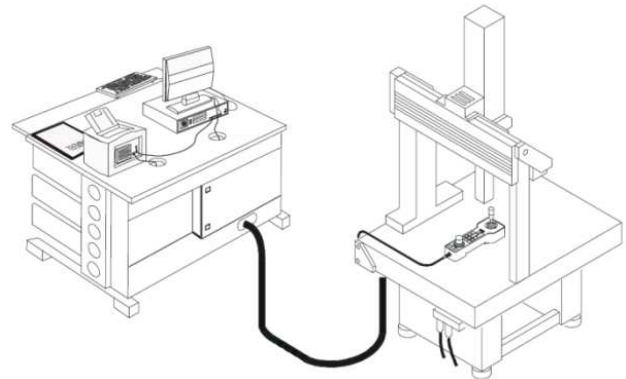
Equipment used for measuring the element made on CNC machine tool (Lim and Menq, 1997)
